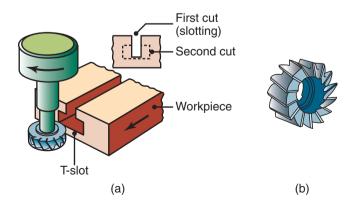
(a) T-slot cutting with a milling cutter. (b) A shell mill.
